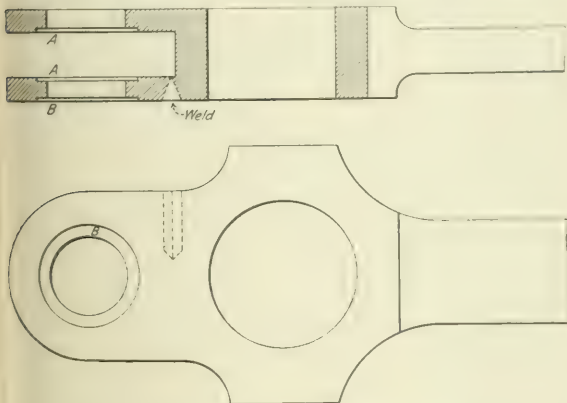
Damaged Jaws on Rods Which May Be Repaired by Oxy-Acetylene Welding.
